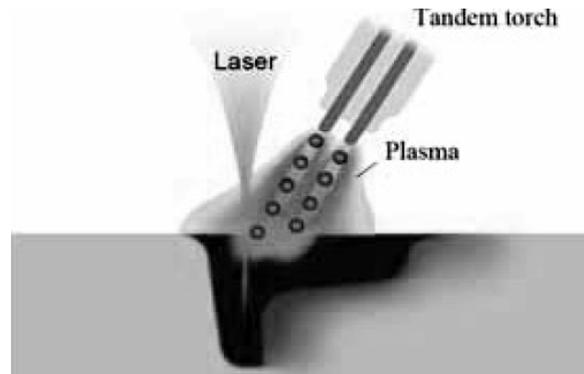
Experimental arrangement of plasma arc augmented laser welding system.
